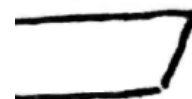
shows another side-view example of what many of the lesser expensive scrapers look like. Illustration #9 shows the same tool but with a steeper bevel so it can be used to make finishing cuts on the inside of a bowl. Again, the steeper angle of the bevel in Illustration #9 provides more mass for durability, but sacrifices sharpness. To make the tool function, you must add a burr to the edge to do the cutting. [Note: It's worth experimenting with different grit wheels on the grinder to raise this burr. A 60-grit wheel will raise a huge burr that is
